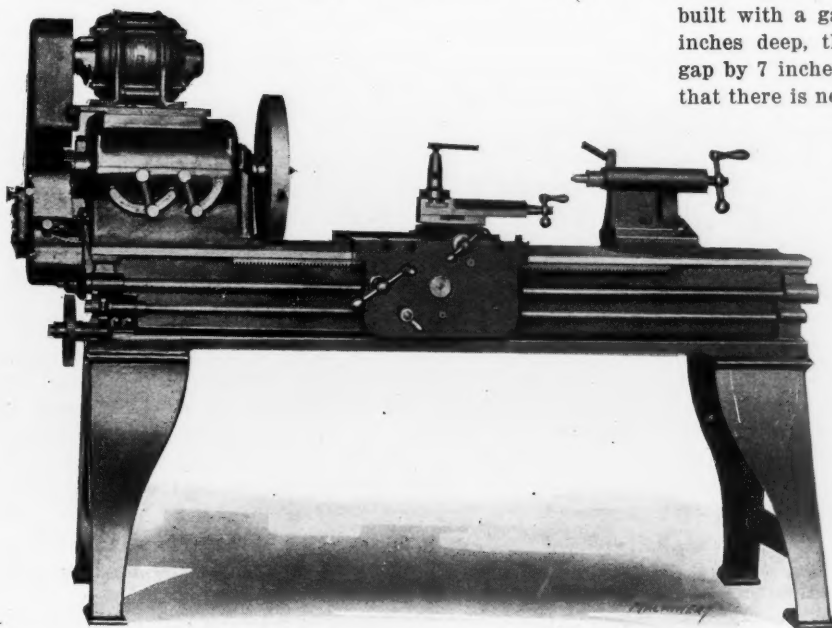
Geared-head Lathe built in 13-, 14- and 15-inch Sizes by Sebastian Lathe Co.
